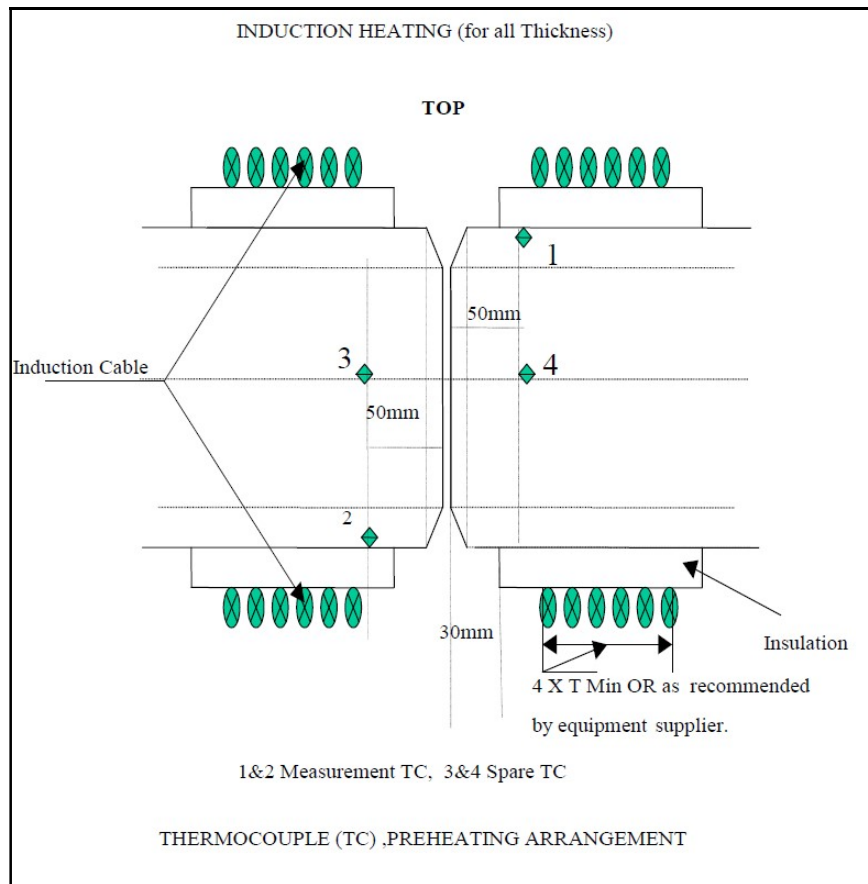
Placement of Thermocouples on P91/P92/F91/F92/C12A materials for Preheating
